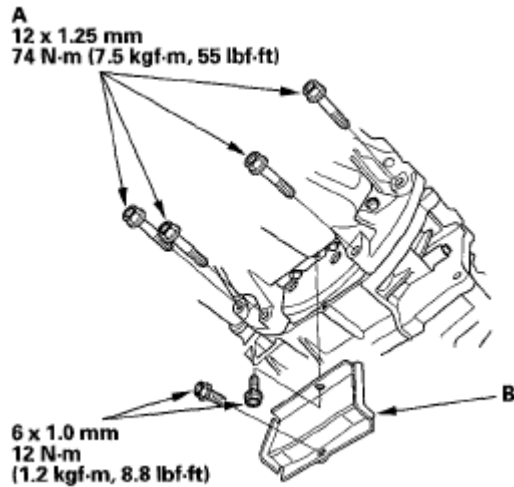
Identifying Torque Converter Cover Bolts With Torque Specifications
